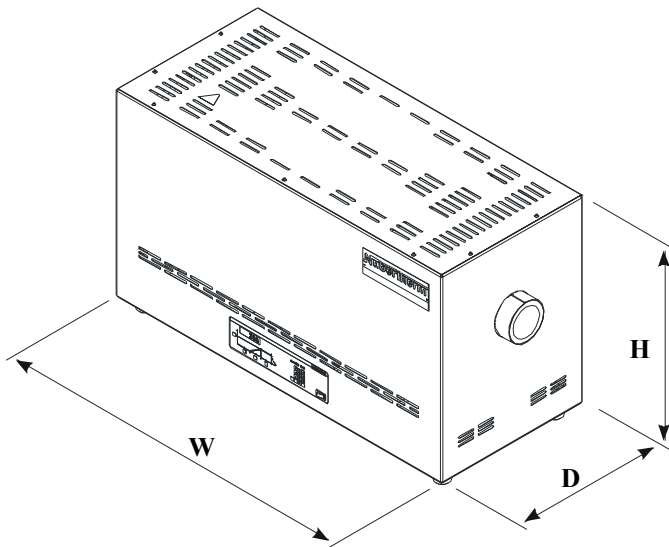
Dimensions of Compact Tube Furnaces, Model R
